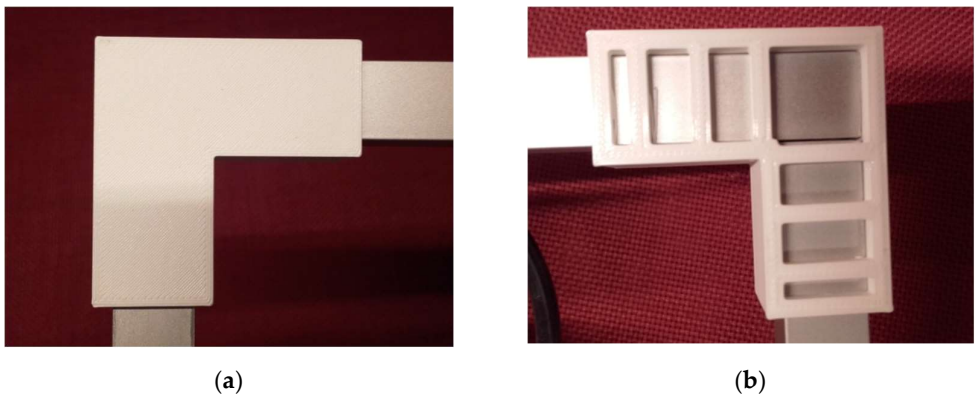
Printed square elbow for the camera holder tubes: (a) Front view; (b) Rear view.
